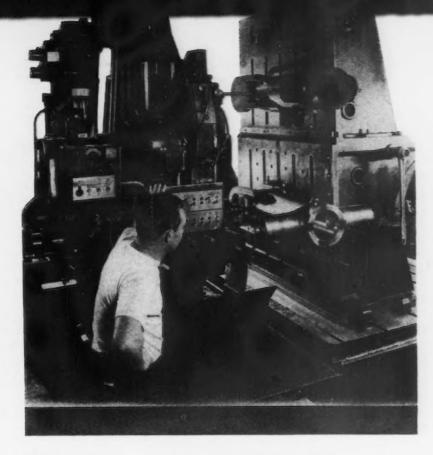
Machined from solid nickel - chromium - molybdenum steel forging, these parts were Kellered using the mahogany pattern in the center supplied by the customer.
